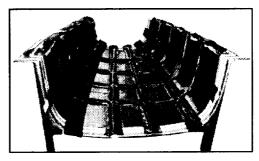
Vacuum-assisted resin transfer molding tooling for fuselage section.
